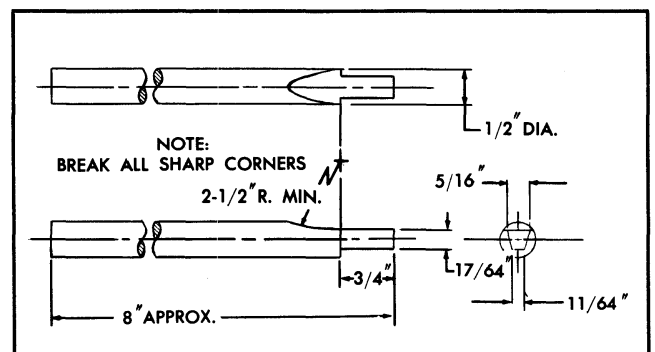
Rear Main Bearing Oil Seal Tool
